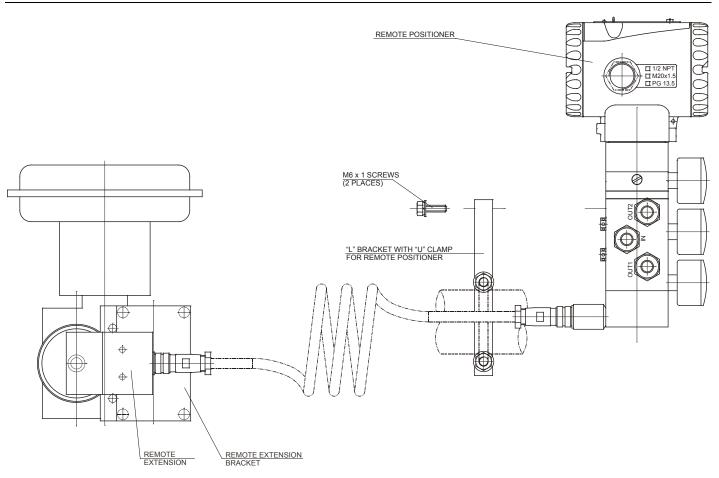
Positioner in Rotary Actuator with Remote Position Sensor
